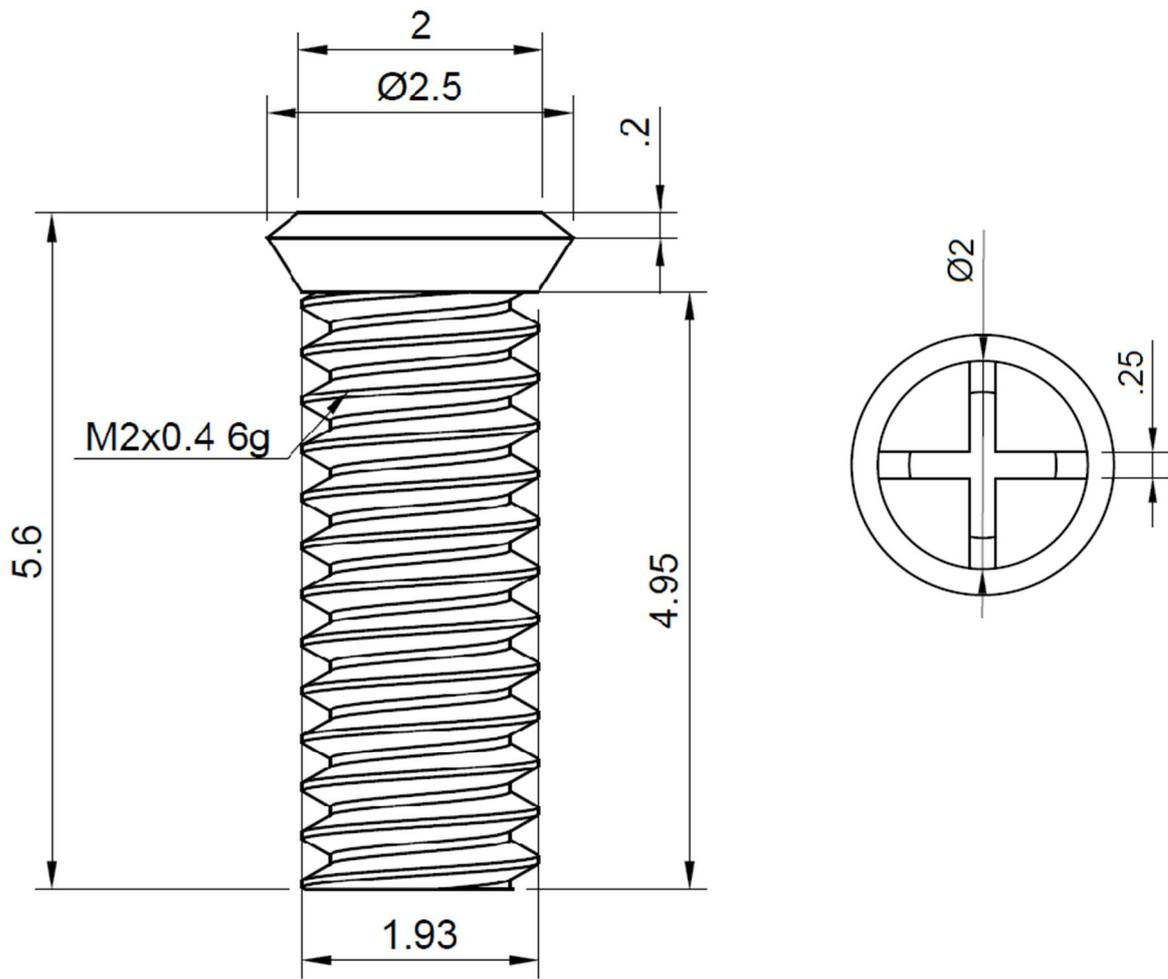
Front and top views of micro screws [all dimensions are in mm]
